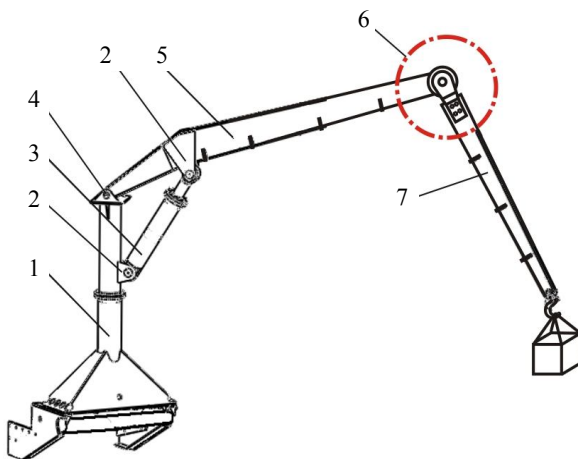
Three-link manipulation system of a mobile boom crane with a drive swing connection
